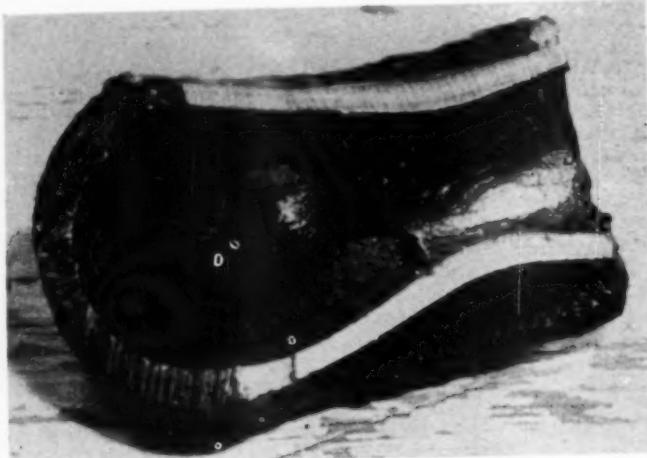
Elbow destroyed by cavitation. This elbow was backed up by welding on additional material until the heater was taken off line. This elbow was then replaced by tee shown in Fig. 3.
